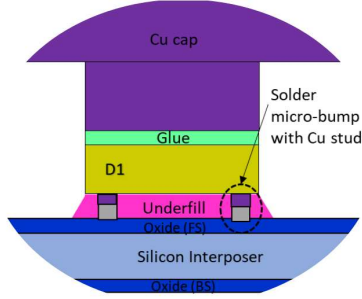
Schematic of layer stack details of package (without solder bumps below interposer and PCB) shown in the Fig.1 (not to the scale)
